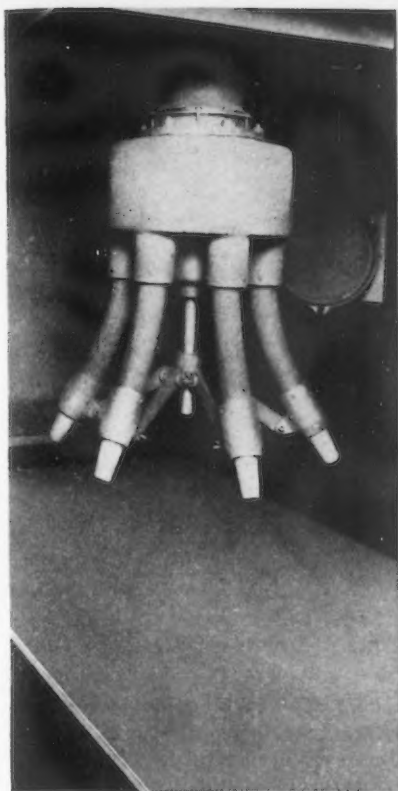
Sheet to be cleaned is passed underneath a rotary gun equipped with Carbonyl nozzles and revolved at high speed.
